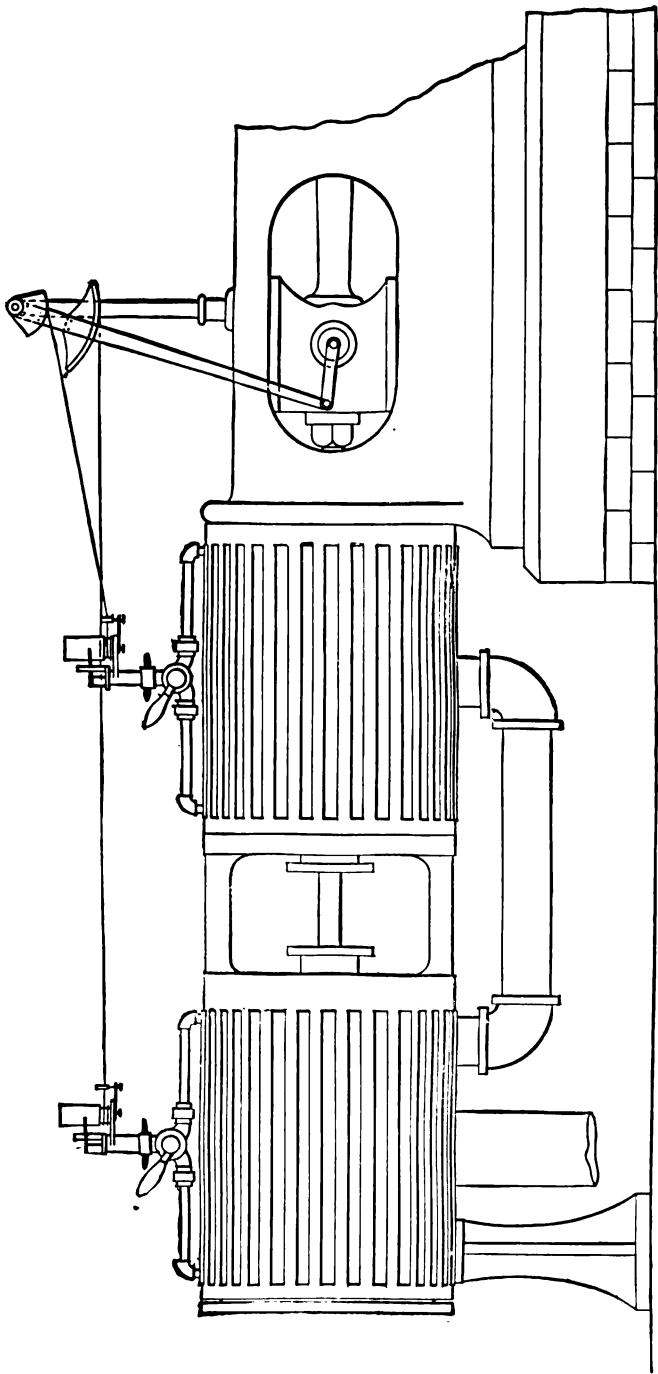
Ordinary Form of Indicator Rig for a Compound Engine.
